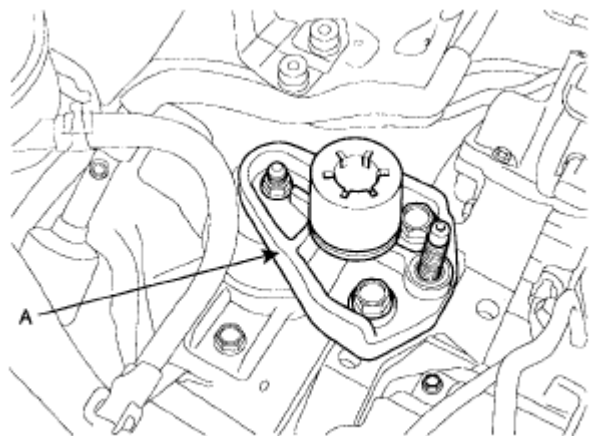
Identifying Subframe Mounting Bolts (1 Of 2)
